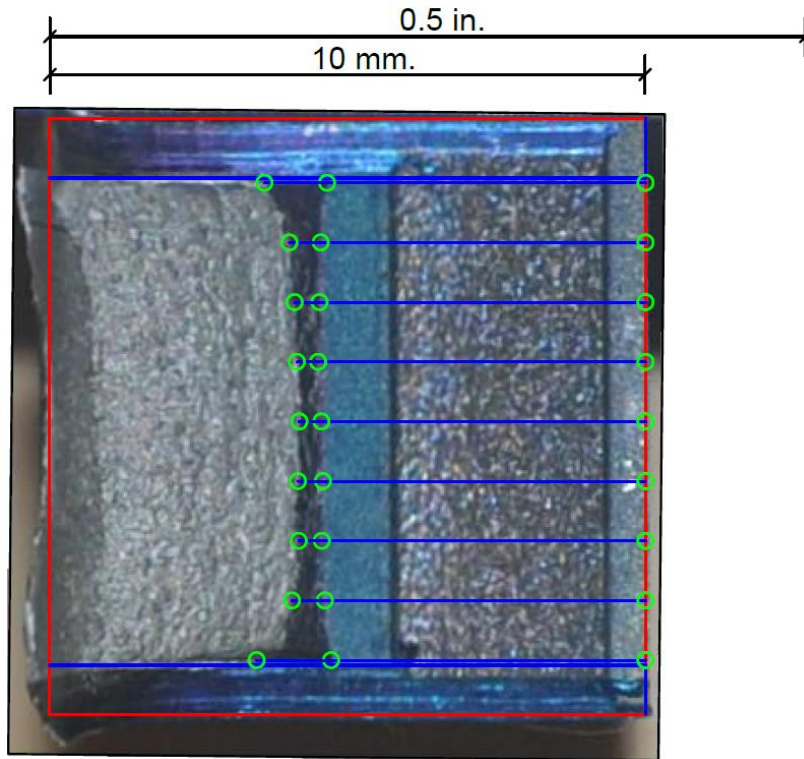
Specimen D1' Fracture Surface
